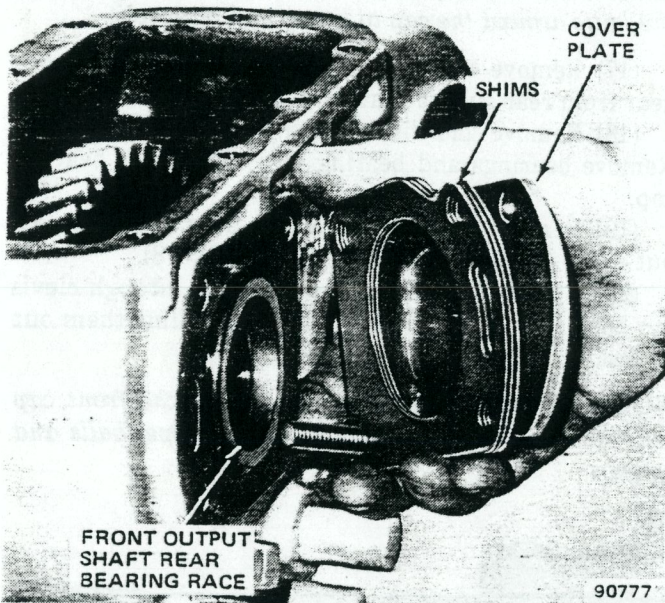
D-79 Cover Plate, Shims and Front Output Shaft Rear Bearing Race
